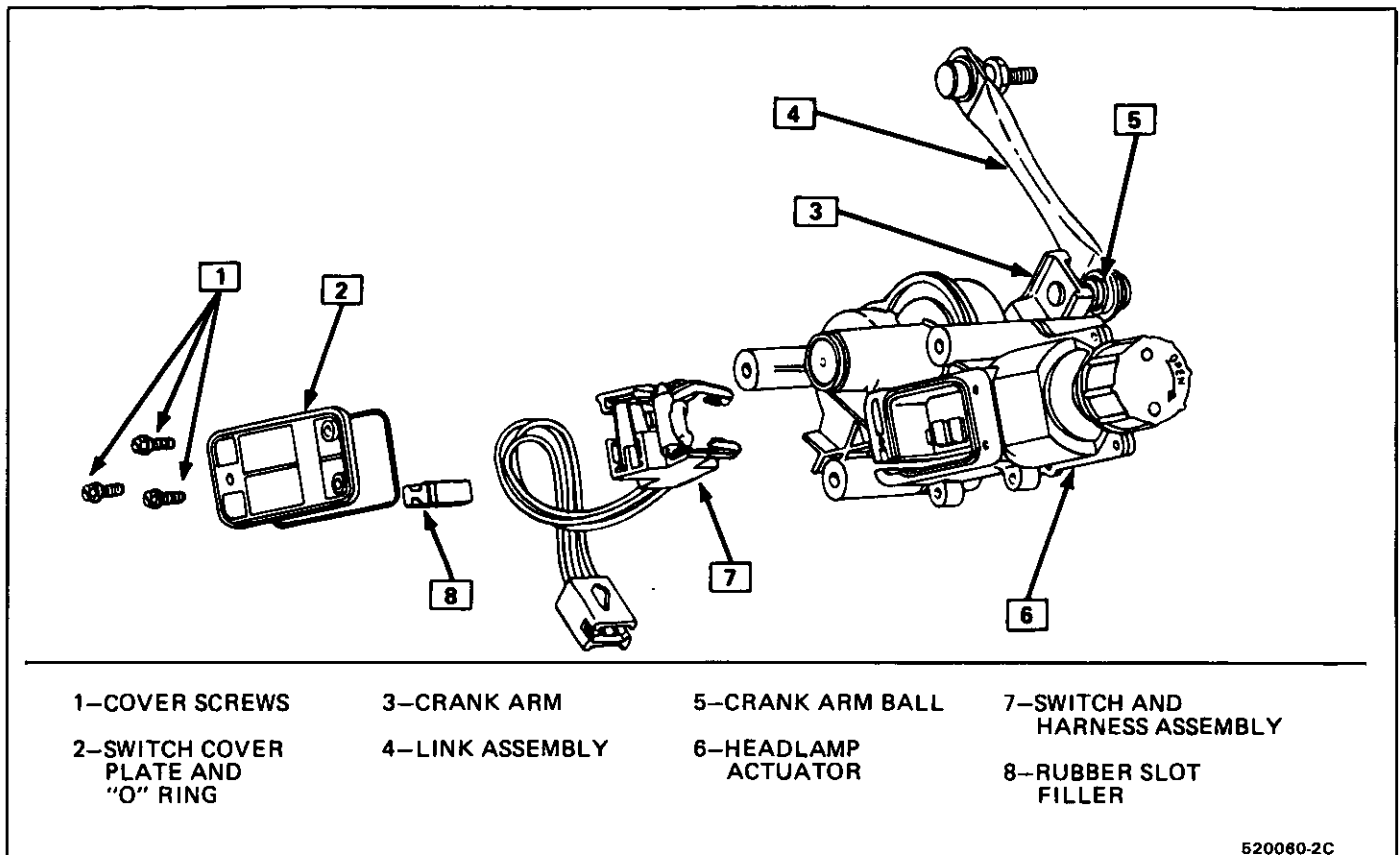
Headlamp Actuator Switch and Harness Assy.
